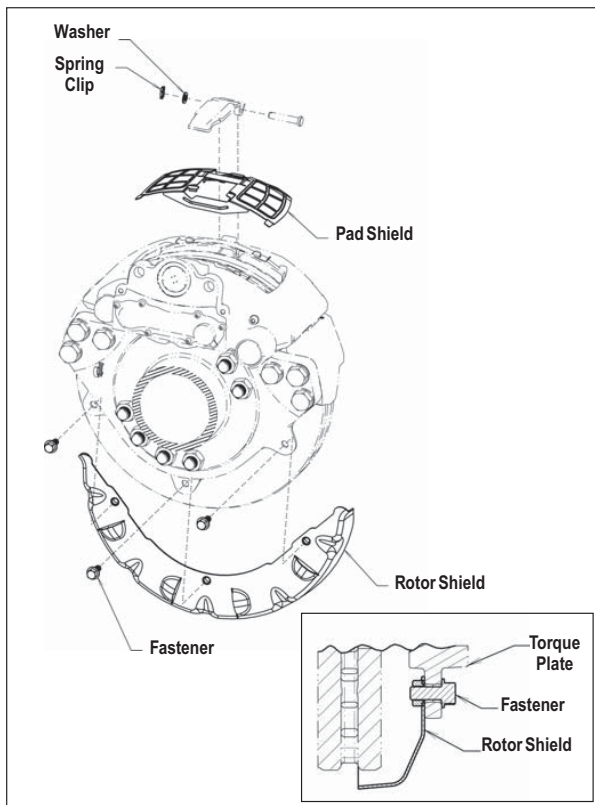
DRIVE OR STEER AXLE EXPLODED VIEW WITH INSET SHOWING ROTOR SHIELD INSTALLATION
